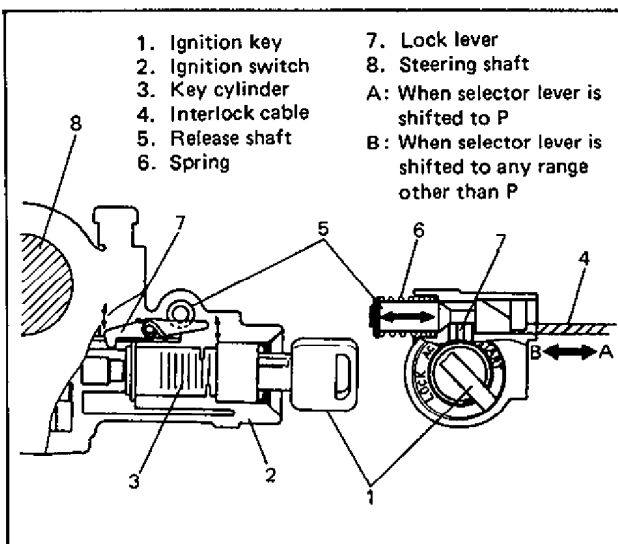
B-7-4 Ignition Switch Lock Mechanism
